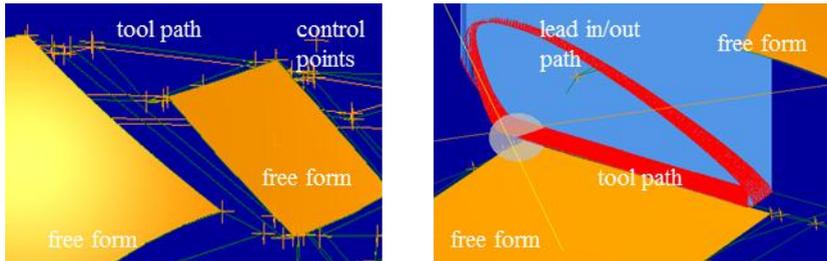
Several tool path setups for free form milling and planing including smooth lead in/out strategies.
